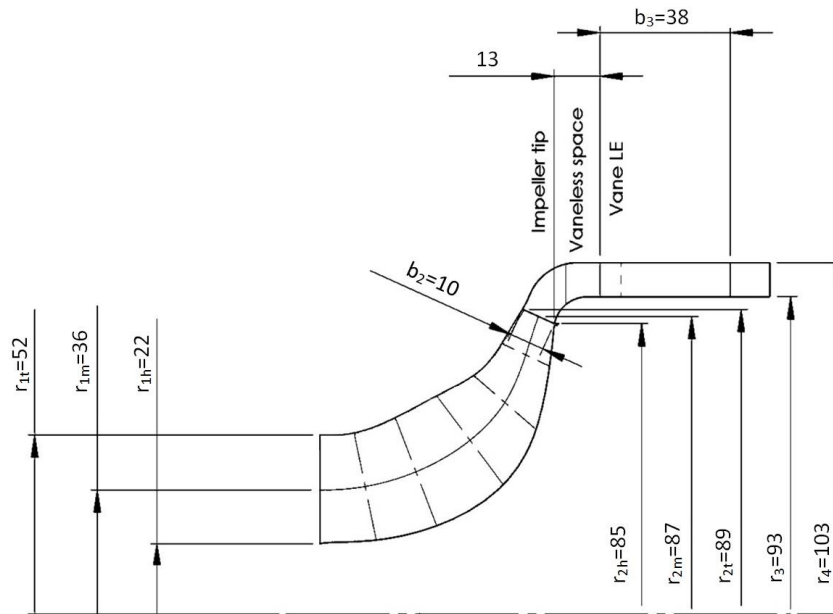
Meridional view of centrifugal compressor (the dimensions are in [mm])
